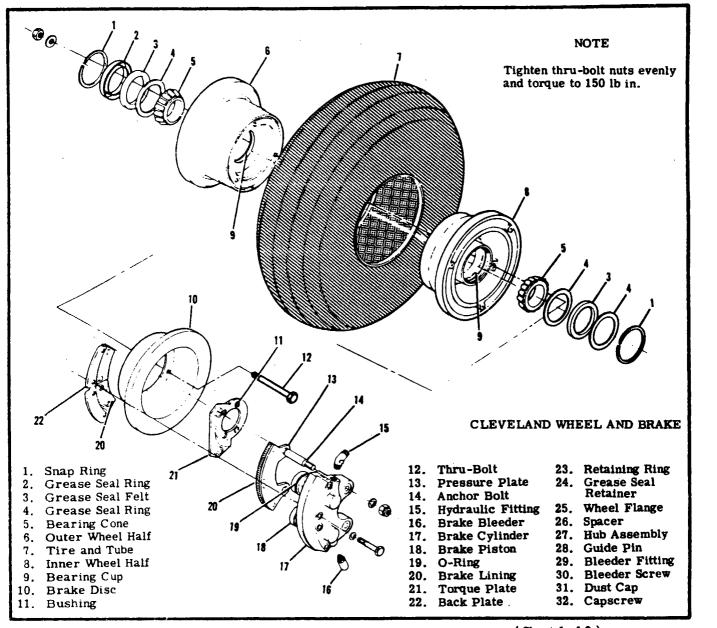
Main Landing Gear Wheel, Tire and Brake Assembly (Sheet 1 of 3)
